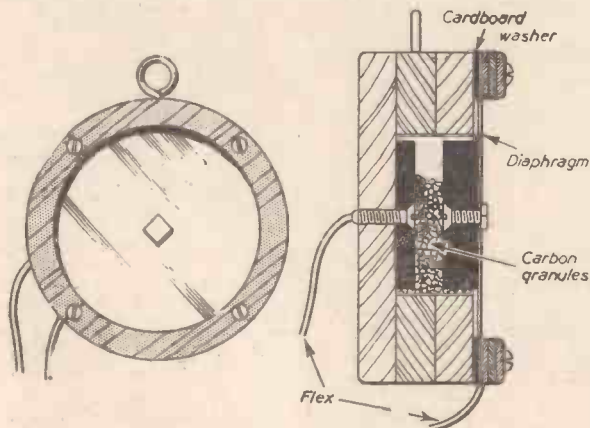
A front view of Fig. 2.—A sectional view showing the microphone. details of construction.
